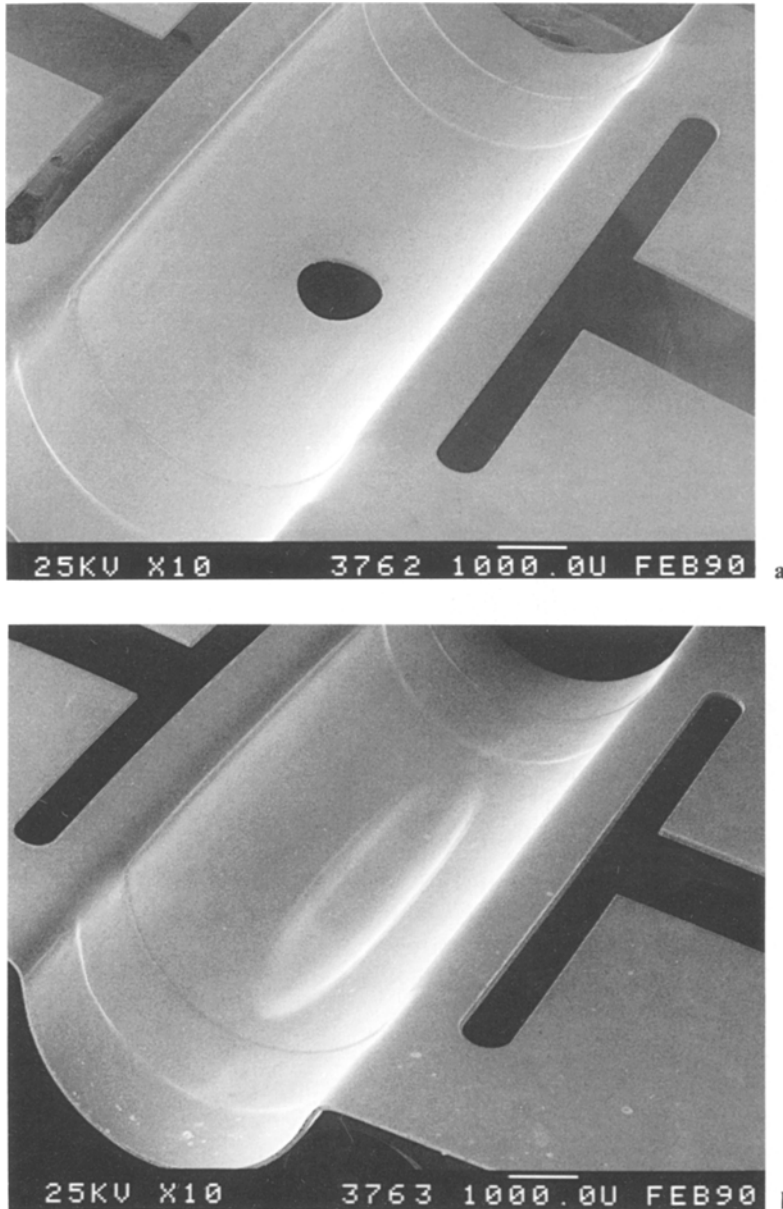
Upper (a) and lower (b) tube parts of the tungsten tube assembly for the new WETA-ETAAS device (from Ortner et al. [36])
